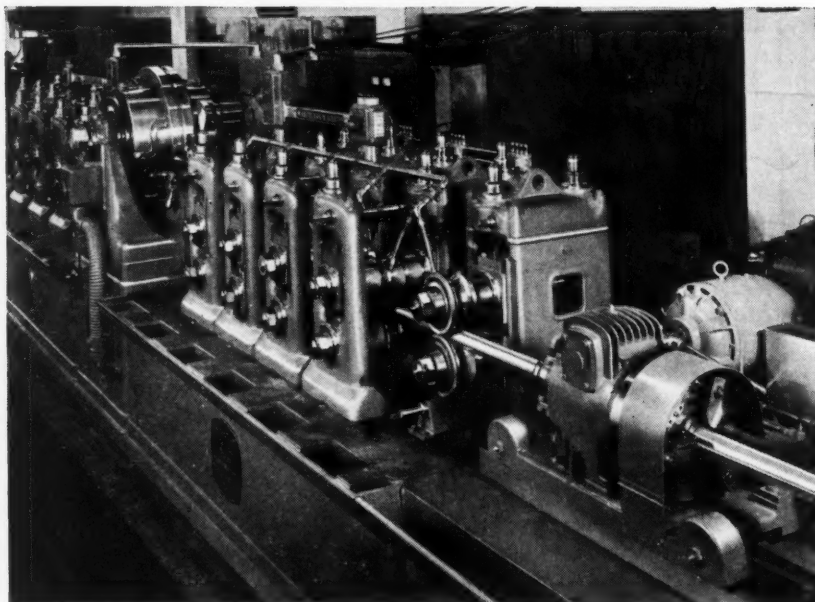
The Discharge End of a Cold-forming and Electric Welding Machine Made by the American Electric Fusion Co. The Large Rolls at the Left are the Welding Electrodes; at the Far Right is the Cut-off Machine
